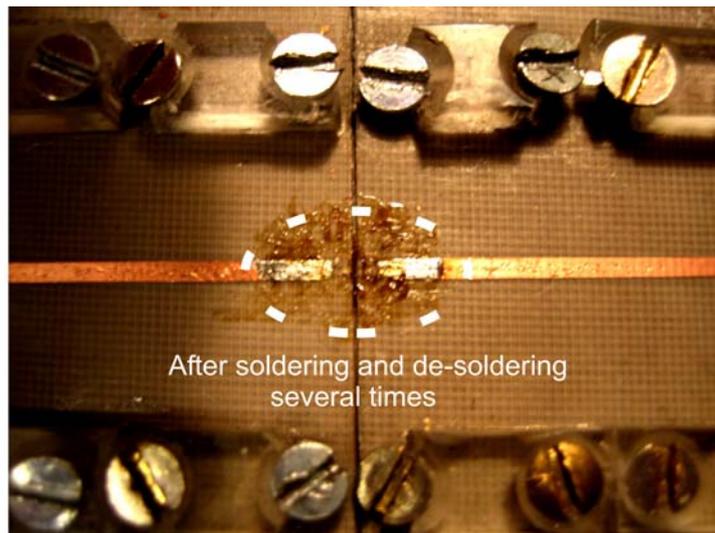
Photograph of the microstrip after several times soldering and desoldering.
